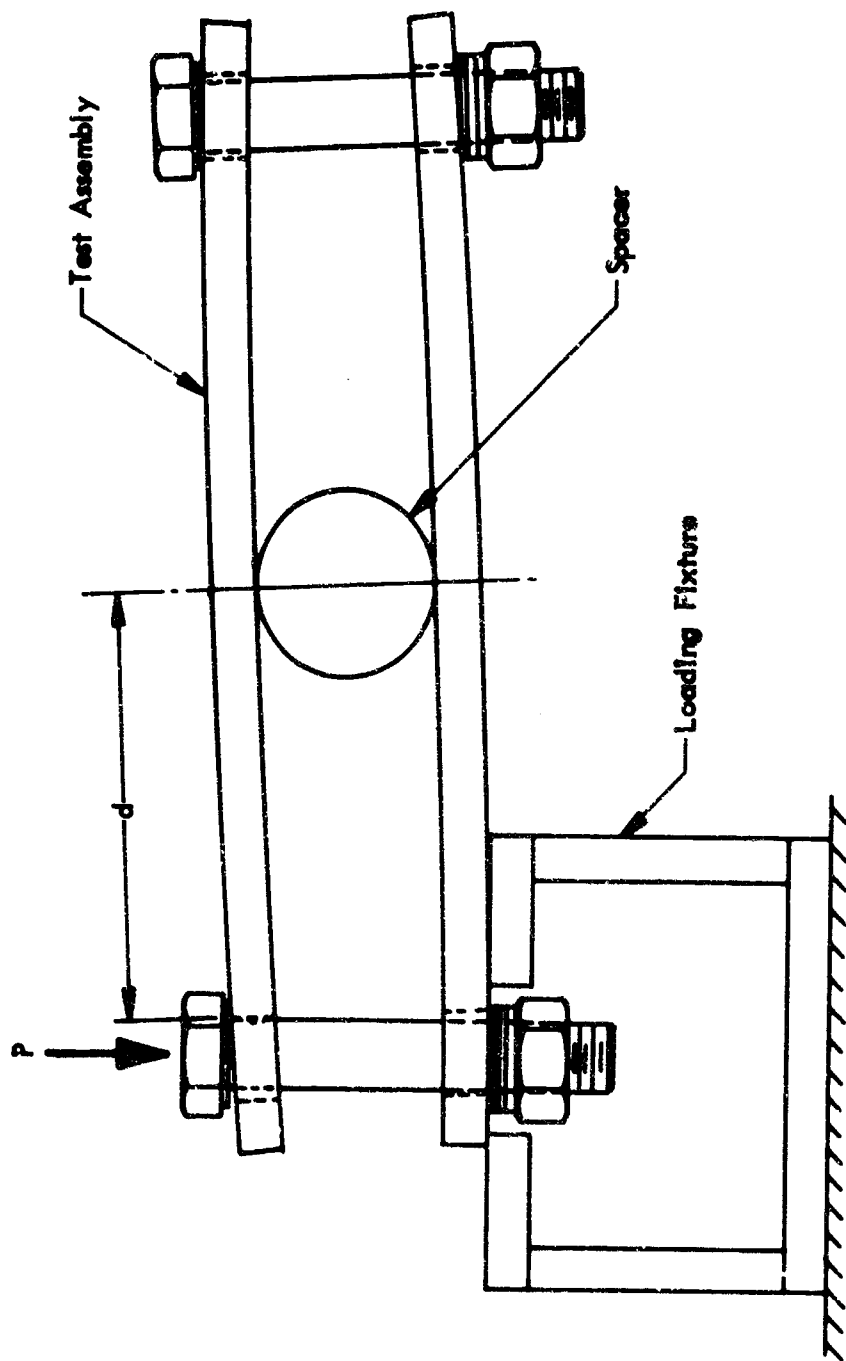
SFB SPECIMEN ASSEMBLY PRELOADING (Three Point Bend)
